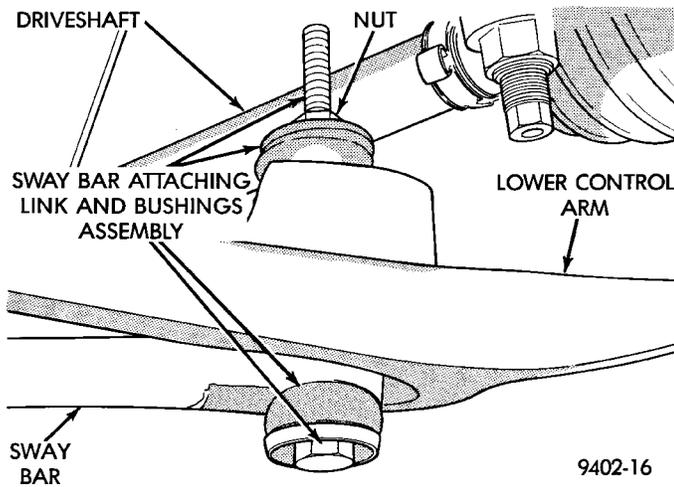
Installed Stabilizer Bar To Lower Control Arm Attaching Link
